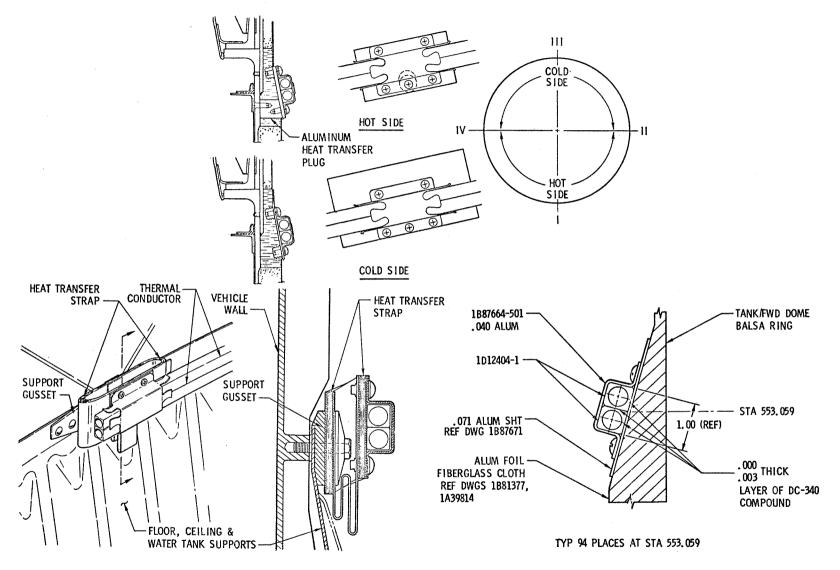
Heat Pipe Installation -- OWS Wall
